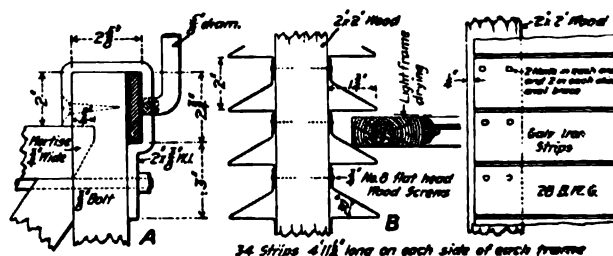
Details of the Special Corner-piece Clamps for securing the stanchions and of Triangular Galvanised Iron Supporting Straps.
